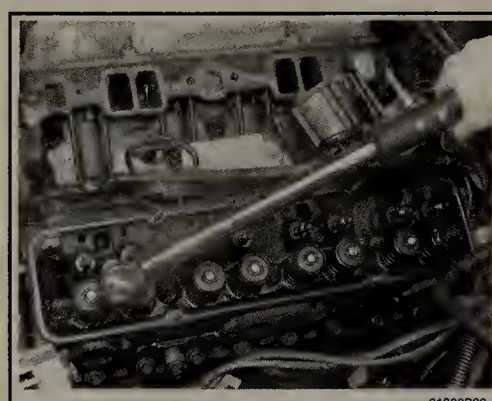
Always use a torque wrench to tighten the cylinder head bolts to specifications
